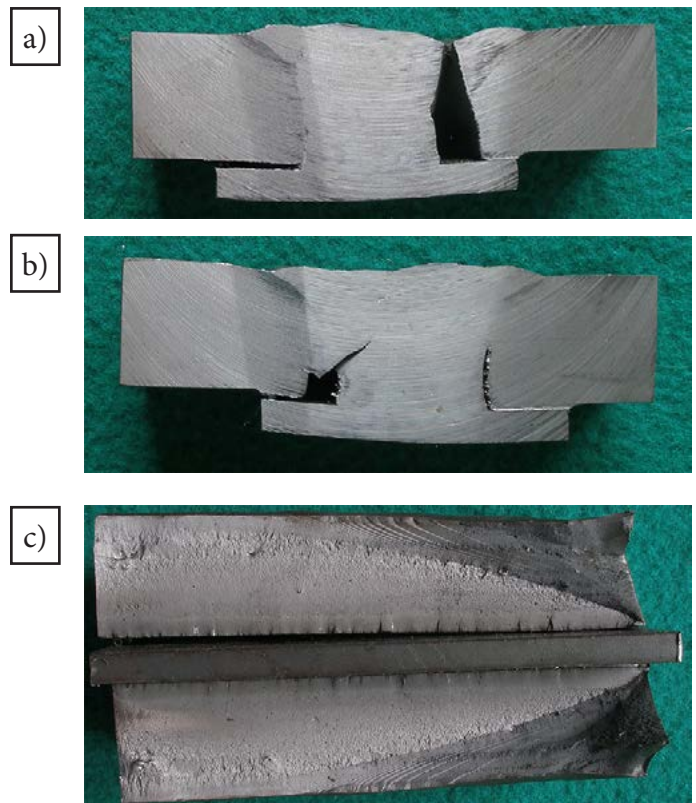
Areas of fatigue crack initiation in the specimens: a), b) cracks on the cross-section of the joint, c) fatigue crack with the visible crack centre
